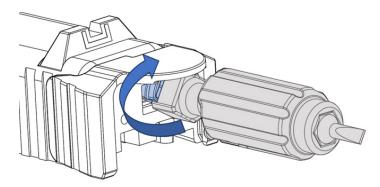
Press the Tool and rotate it 90° clockwise to secure the RDC Coil into position.
